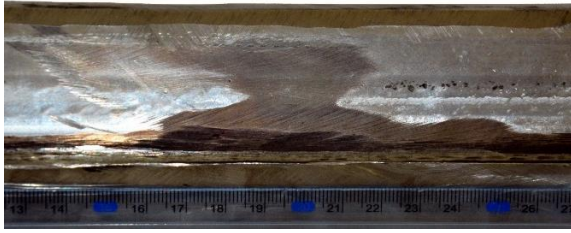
A section of a tooth (130...220 mm) with traces of the beginning of cracking (side B)
